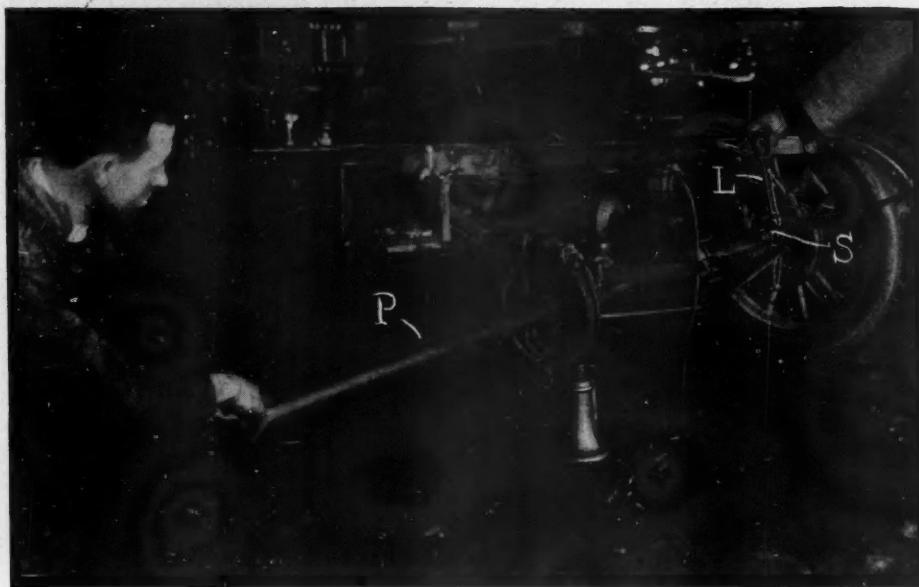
SHOWING HOW A SLIGHTLY BENT AXLE CAN BE STRAIGHTENED
